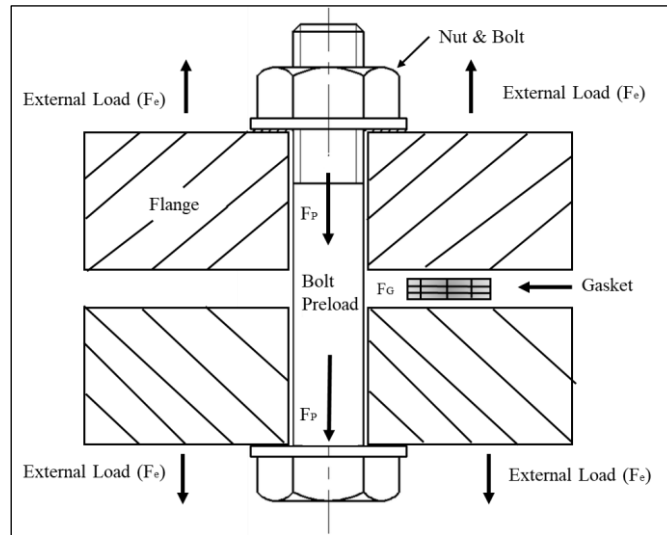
Schematic illustration of bolted flange joint (Nelson et al., 2023).
